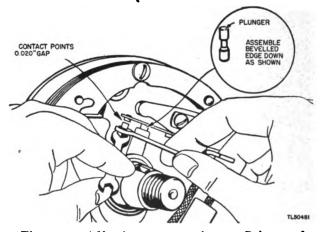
Adjusting contact points on Briggs and Stratton engine magneto.
